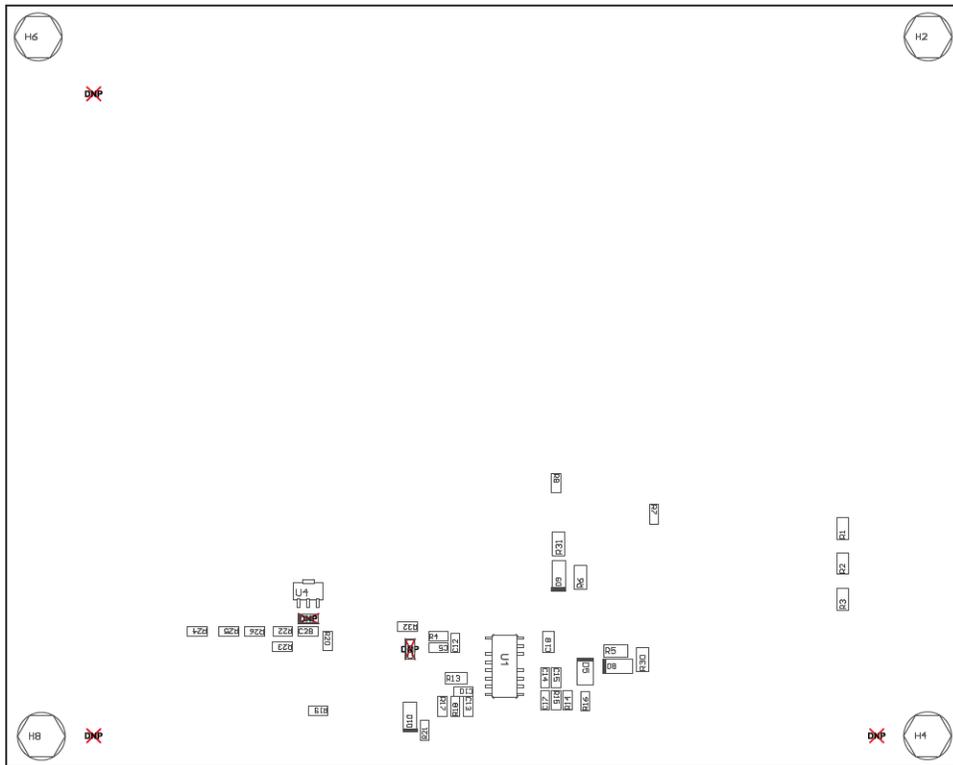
UCC25630-1EVM-291 Bottom Layer Assembly Drawing (Bottom View)
